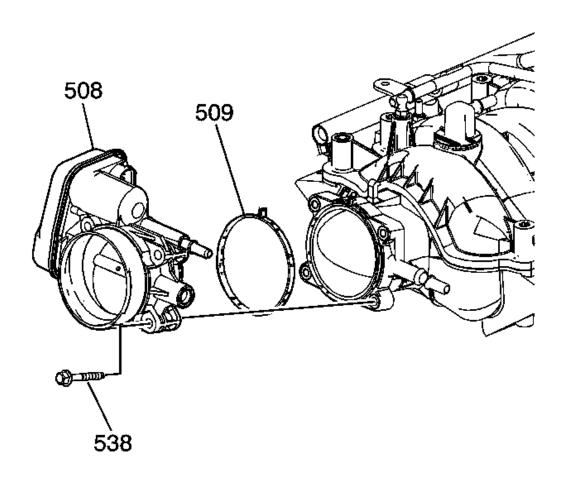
Throttle Body Assembly Courtesy of GENERAL MOTORS CORP.
